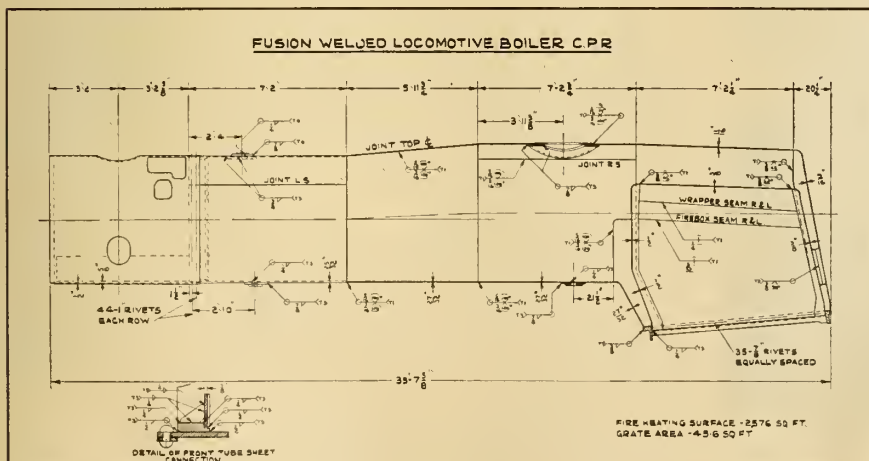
Showing general dimensions of boiler and location of welded seams.
